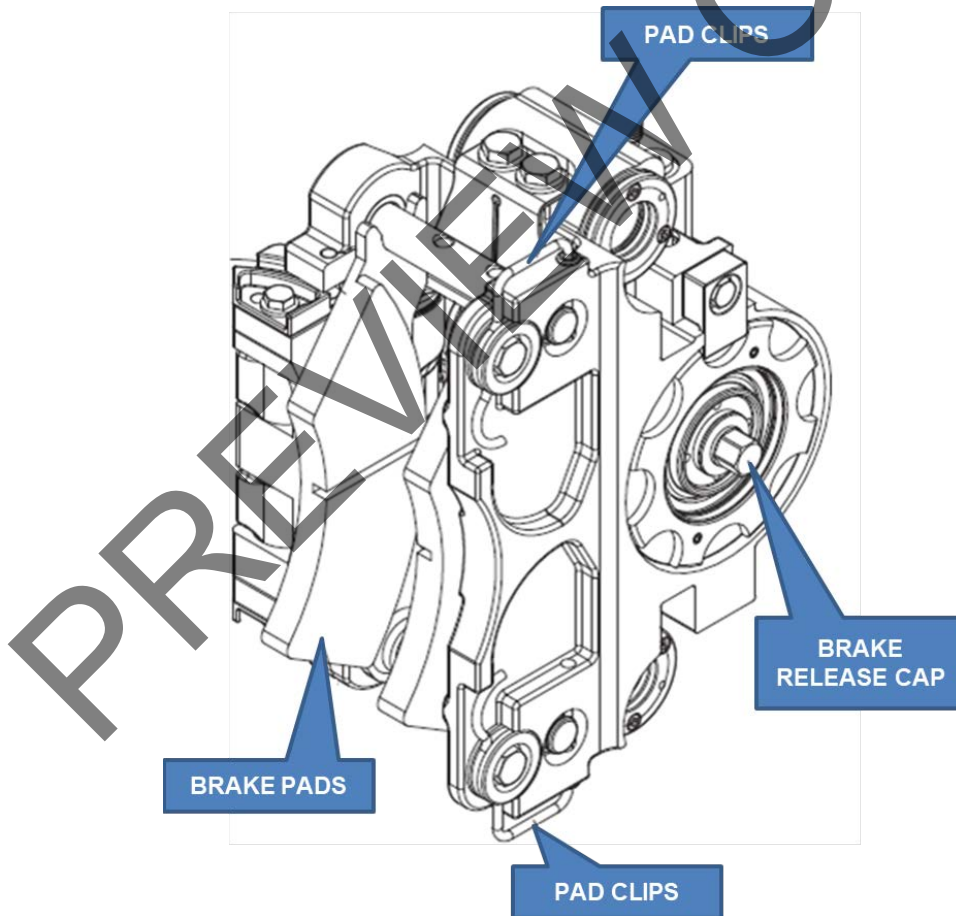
Power Truck Brake Caliper on LRV –courtesy CATS
